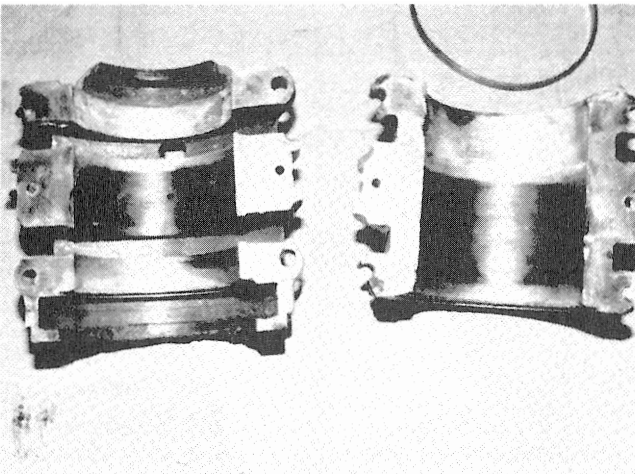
Outboard Bearing of Inboard Motor—Top Half on Left. Note that all Babbitt Damage from Radial Loads, but Severe Axial Shear Damage to the Bearing Shoulder.
